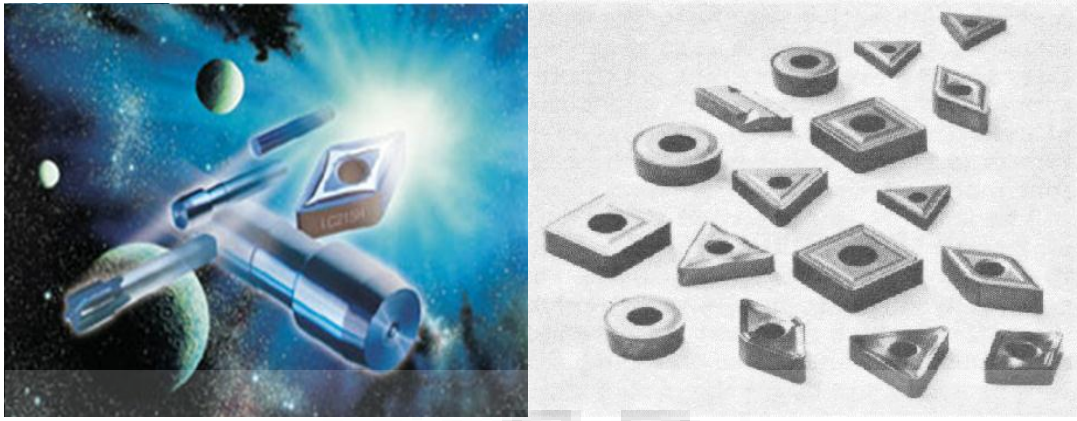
Ti(CN) based cermet cutting tool [Lengfeng Metallica, 2016]
